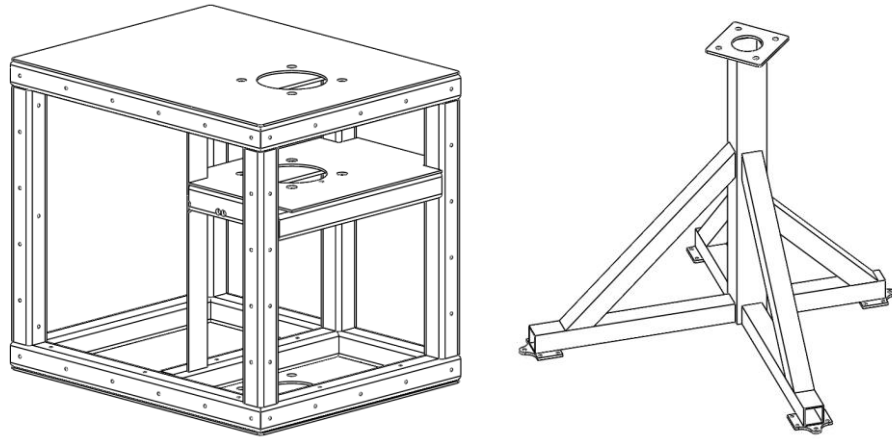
Dimetric View of Rotary Test Fixture Structure (left) and Trimetric View of Stand (right)
